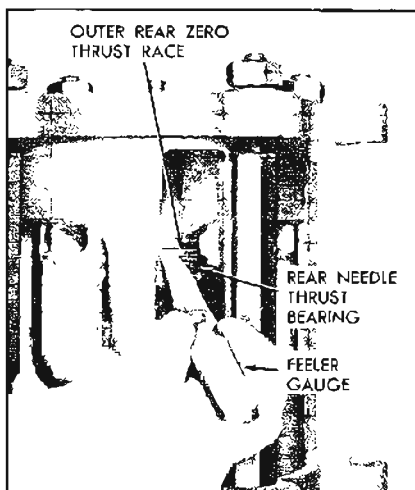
Gauging Clearance Between Rear Needle Thrust Bearing and Outer Rear Thrust Race
